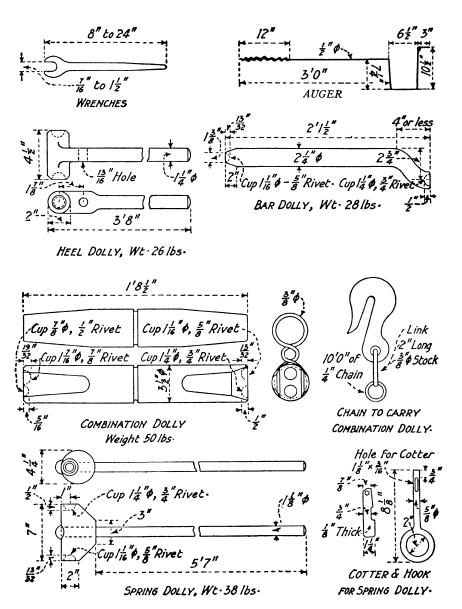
TOOLS FOR ERECTION OF ELEVATED TANKS. CHICAGO BRIDGE & IRON COMPANY.
